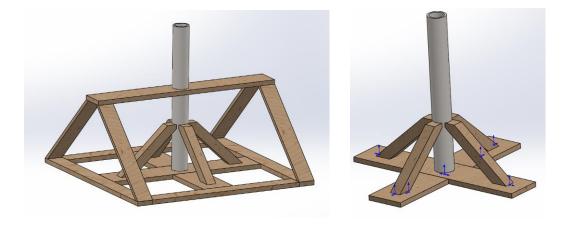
(left): Cross base with truss reinforcements Figure 2 (right): Cross base with pole support beam
